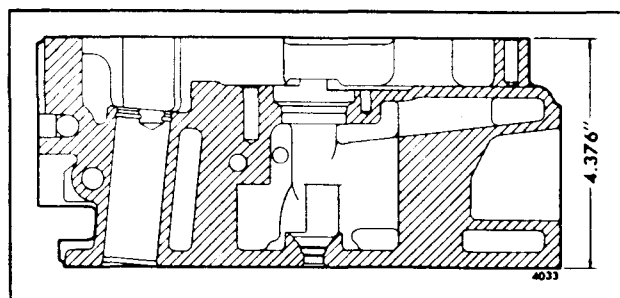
Minimum Distance Between Top and Bottom Faces of Cylinder Head
